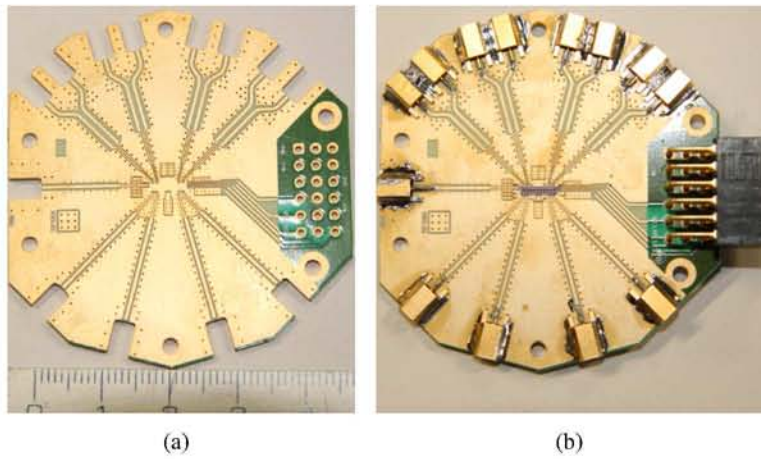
10-channel EAM driver array electric test board: (a) before assembly and (b) after assembly
